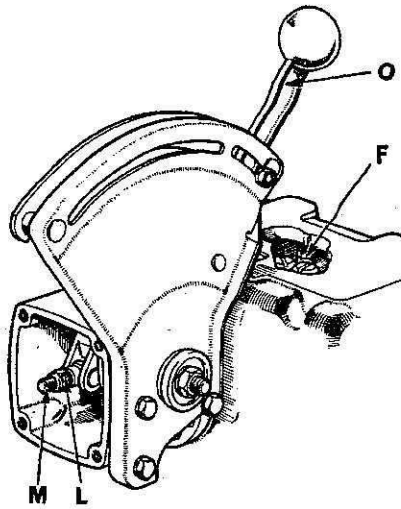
Adjusting points for connecting rod nut (L); refer to text for adjusting procedure.
